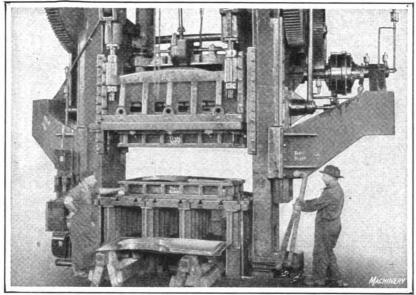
Toggle drawing press with a 9-in. crankshaft, making wheel housings
